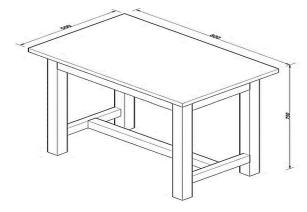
Table in an Isometric drawing with thick and thin line rendering techniques
